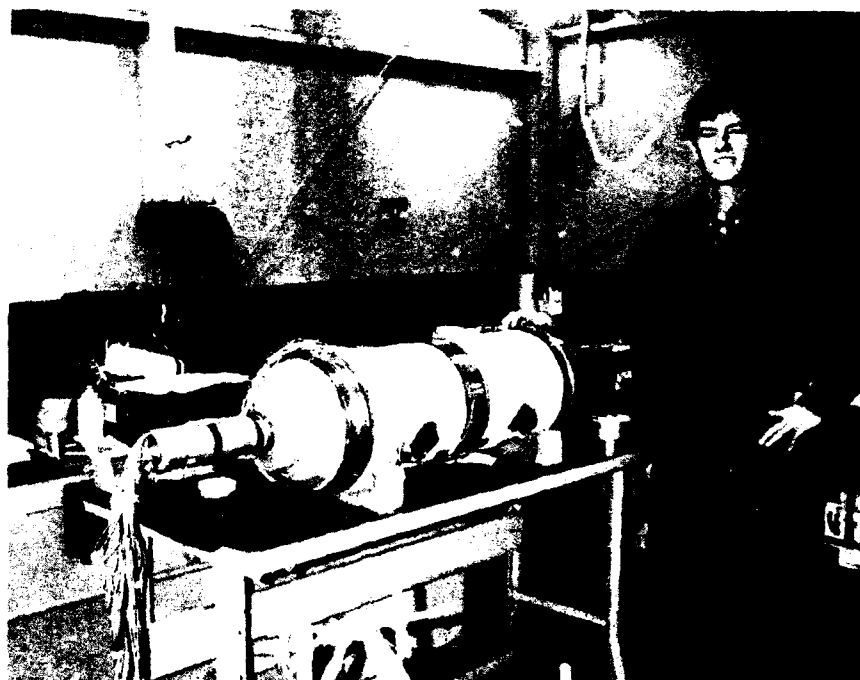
Cylindrical housing assembly after instrumenting with electric-resistance strain gages.
